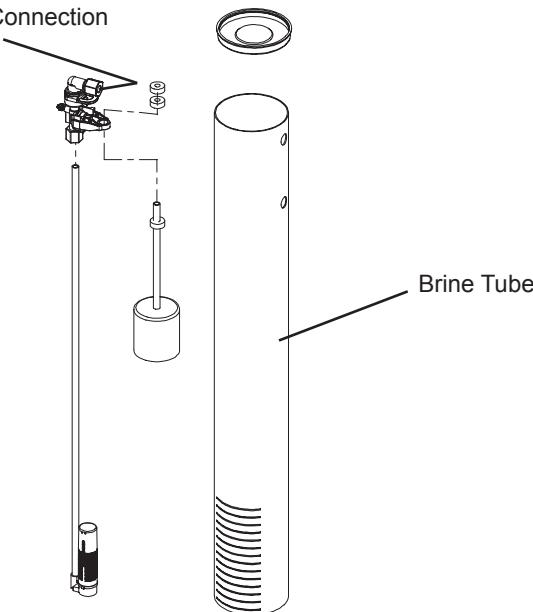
Salt Tank Check Valve and Brine Well Assembly
